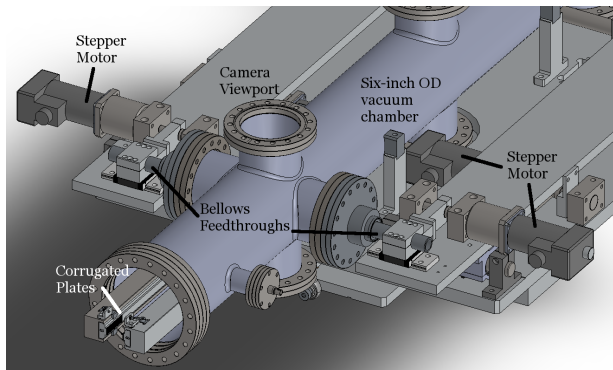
Drawing of dechirper system showing the vacuum chamber than will contain the corrugated plates, stepper motors, and bellows.
